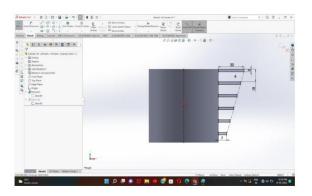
Sketch Is Made for Extended Surfaces
